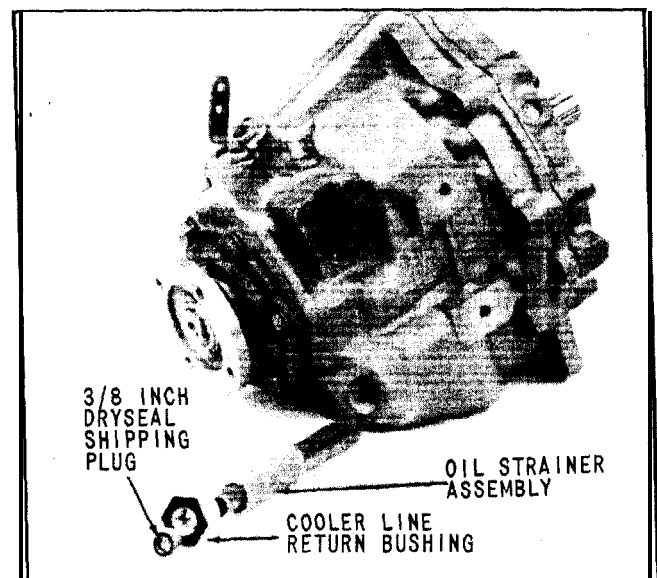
Installation of Oil Strainer Assembly and Cooler Line Return Bushing
